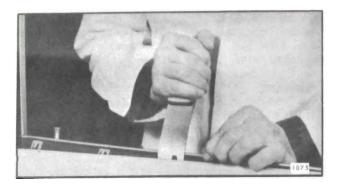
Glass Run Channel Inner - Outer Strip Assembly Removal - ''A-X-Z'' Styles
